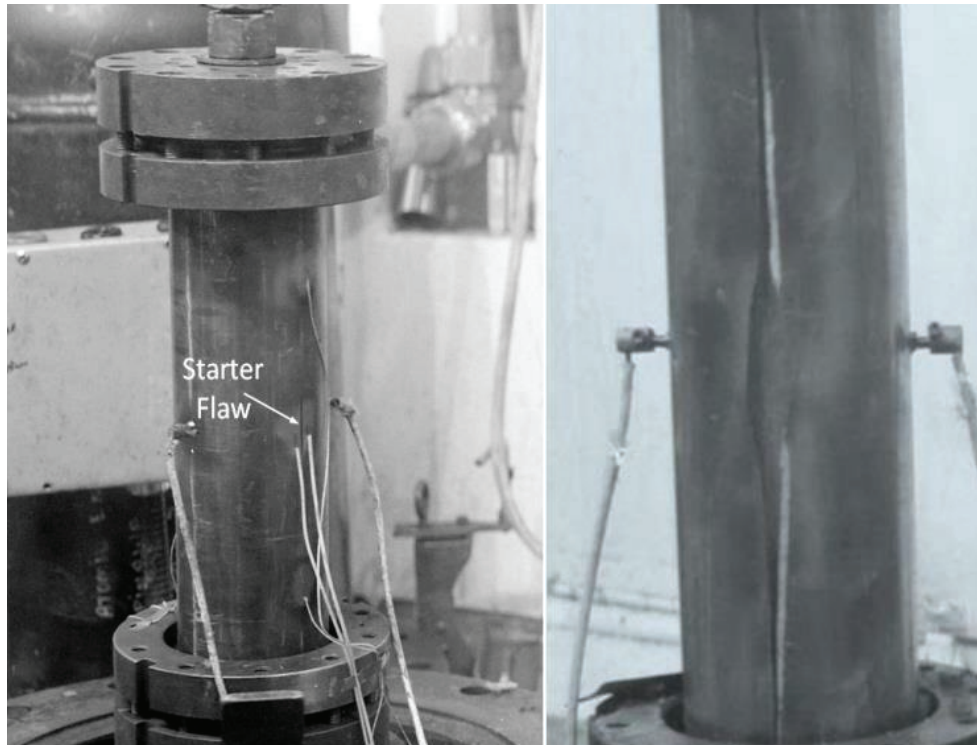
Typical example of ex-service pressure tube burst test showing start of tests (left) with artificial starter flaw noted and at test completion after tube has burst (right)
